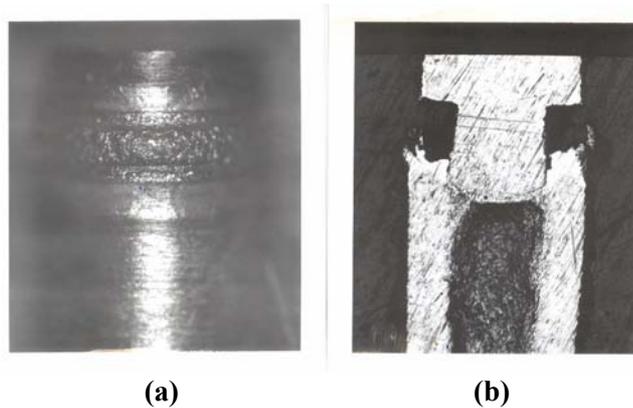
Optical metallograph of Welded capsules (a) Outer Surface (b) Inner cross-section
